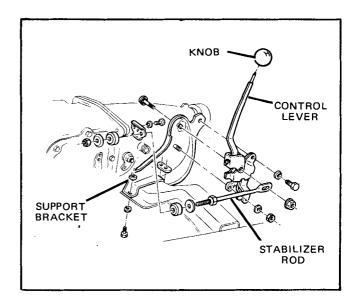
A-15 Floor Shift Control Lever and Bracket Assembly (X Series)
